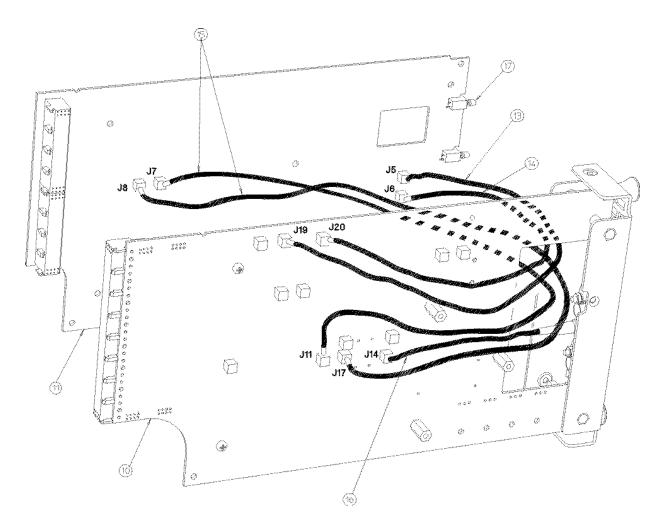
Option UKT/USN STM 1/4 Optical Module - Exploded View (Rear)
